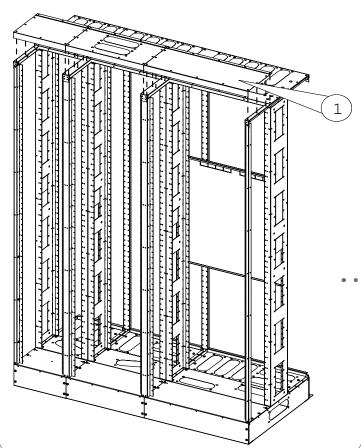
Back profiles and joint back profiles are fastened with screws to dividers and intermediate beads.
